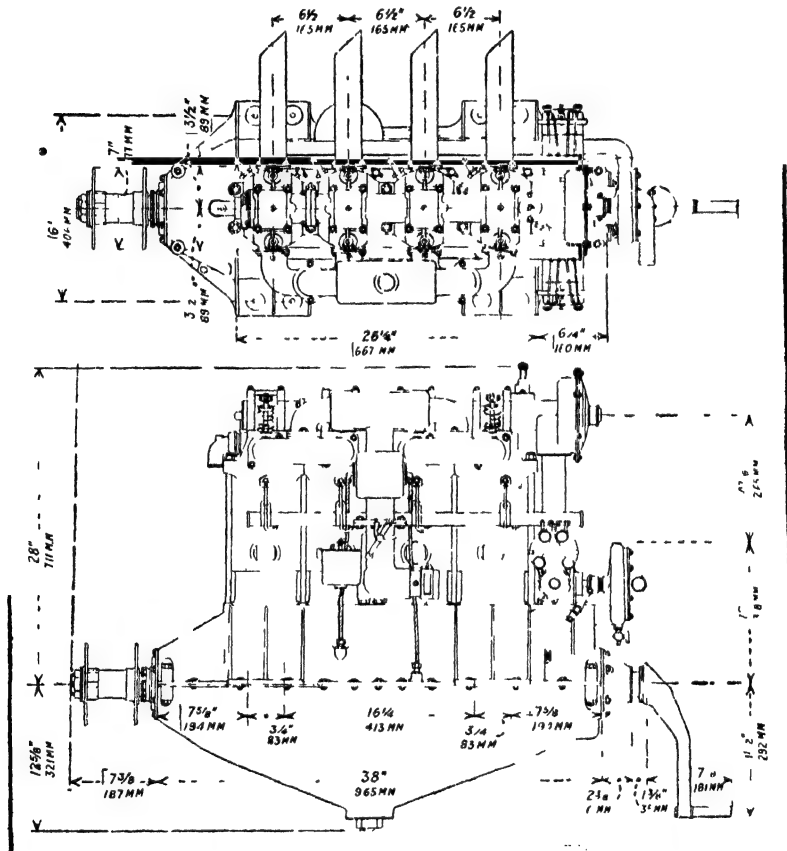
Plan and Side Elevation of Hall-Scott A7 Four-Cylinder Airplane Engine with Installation Dimensions.
